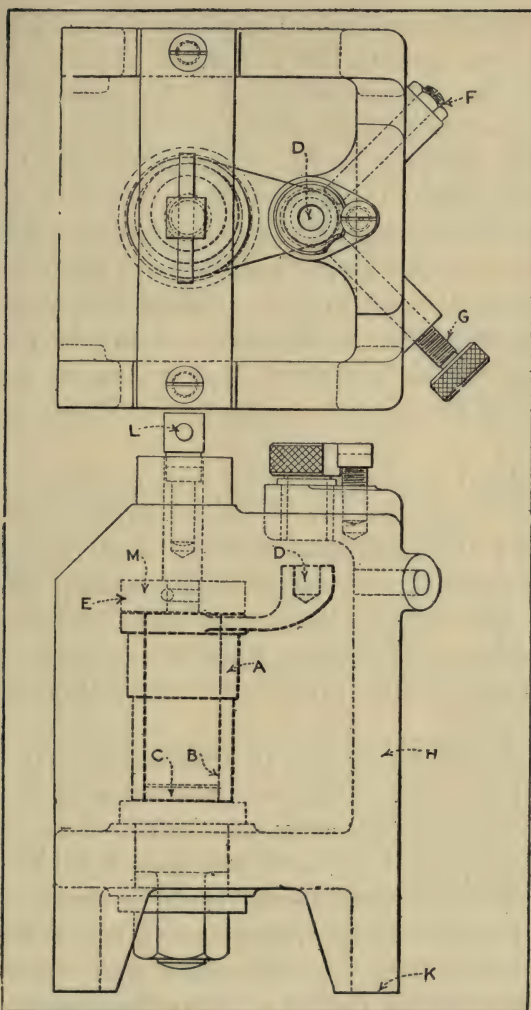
DRILL JIG FOR AN ECCENTRIC BUSHING
